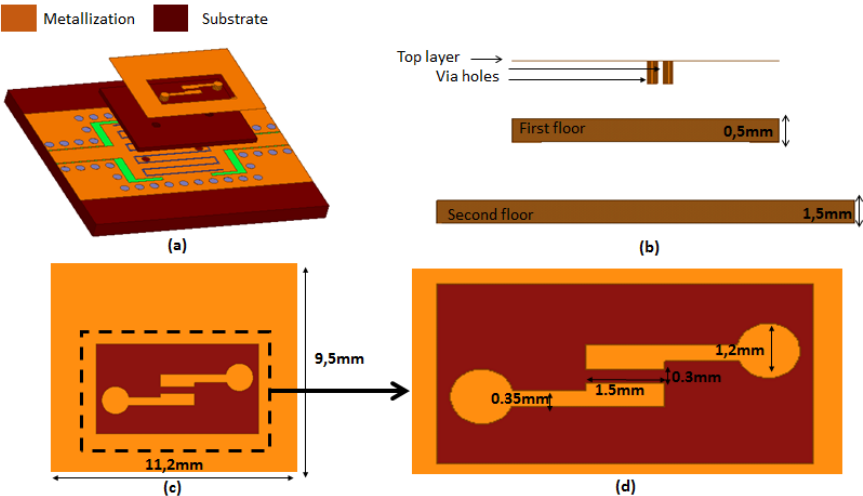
(a) exploded view, (b) front view, (c) top view of the second substrate, (d) zoomed top view
